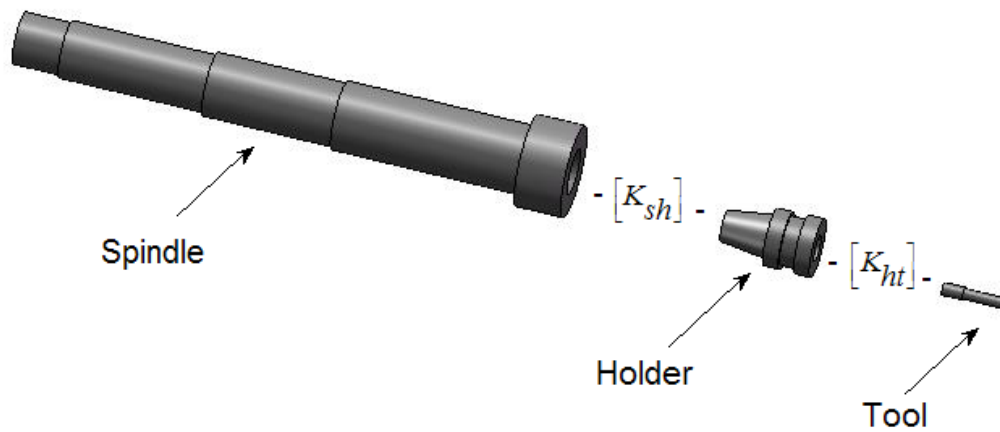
Components of spindle-holder-tool assembly and the complex stiffness matrices of spindle-holder and holder-tool interfaces.
